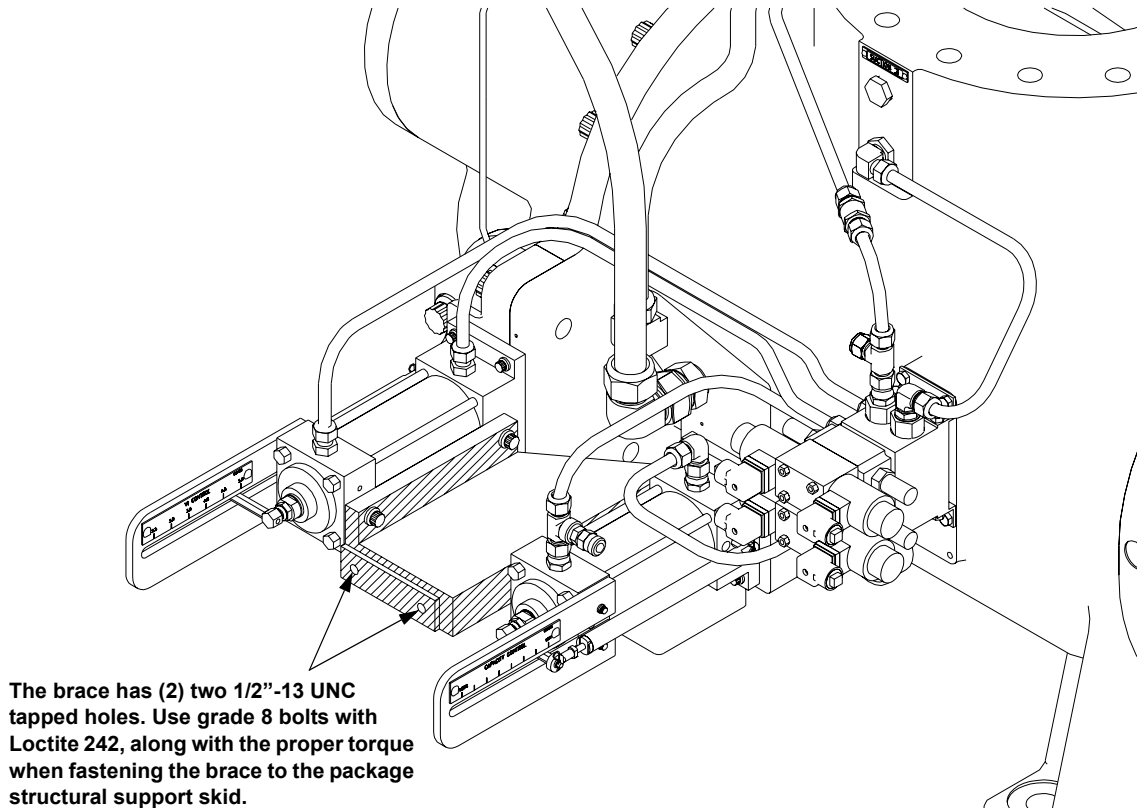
HYDRAULIC CYLINDER BRACE
